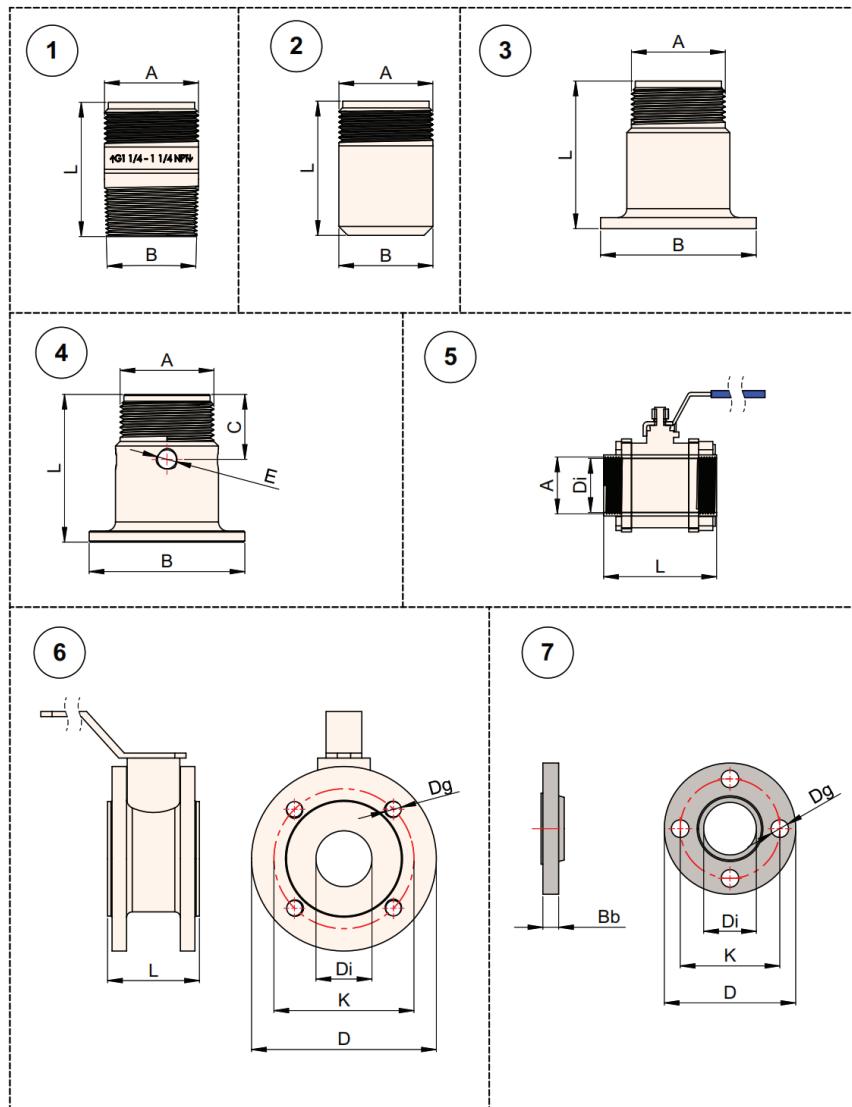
Dimensional drawing PR10 options - refer to tables 4 and 5 on next page
